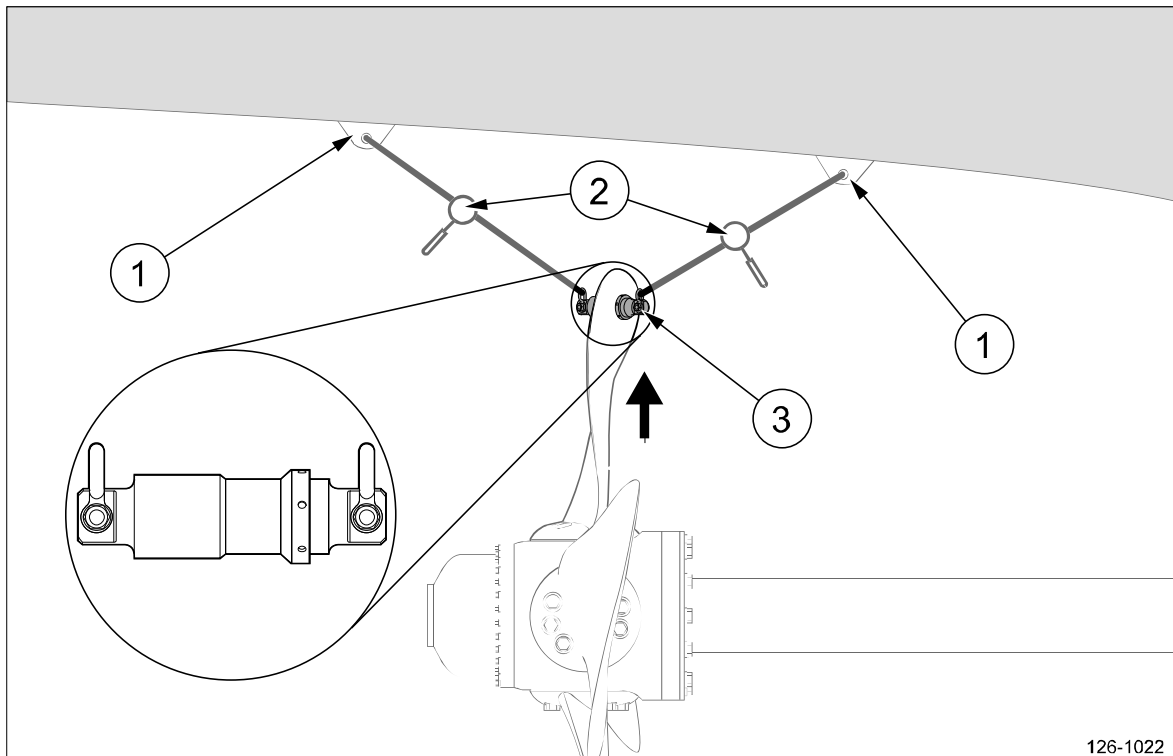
The blade is lifted using the lifting hole and special lifting tool.
